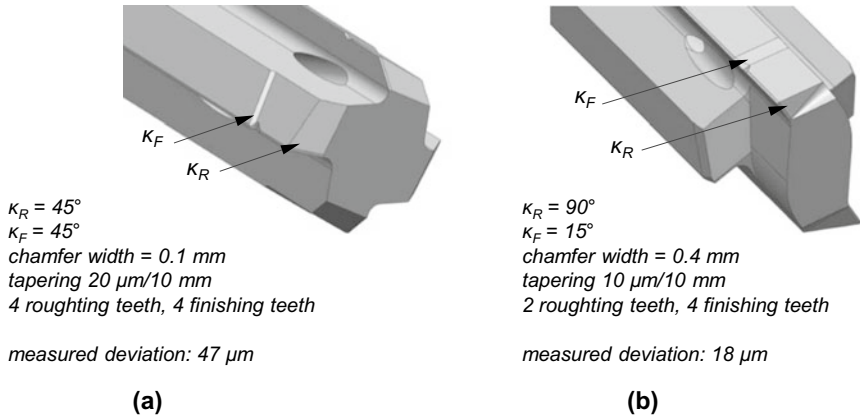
a Original reaming tool geometry and b adapted reaming tool geometry with measured radial deviation for cutting speed of 60 m/min, feed of 0.4 mm/U and axis offset of 0.06 mm [82]
